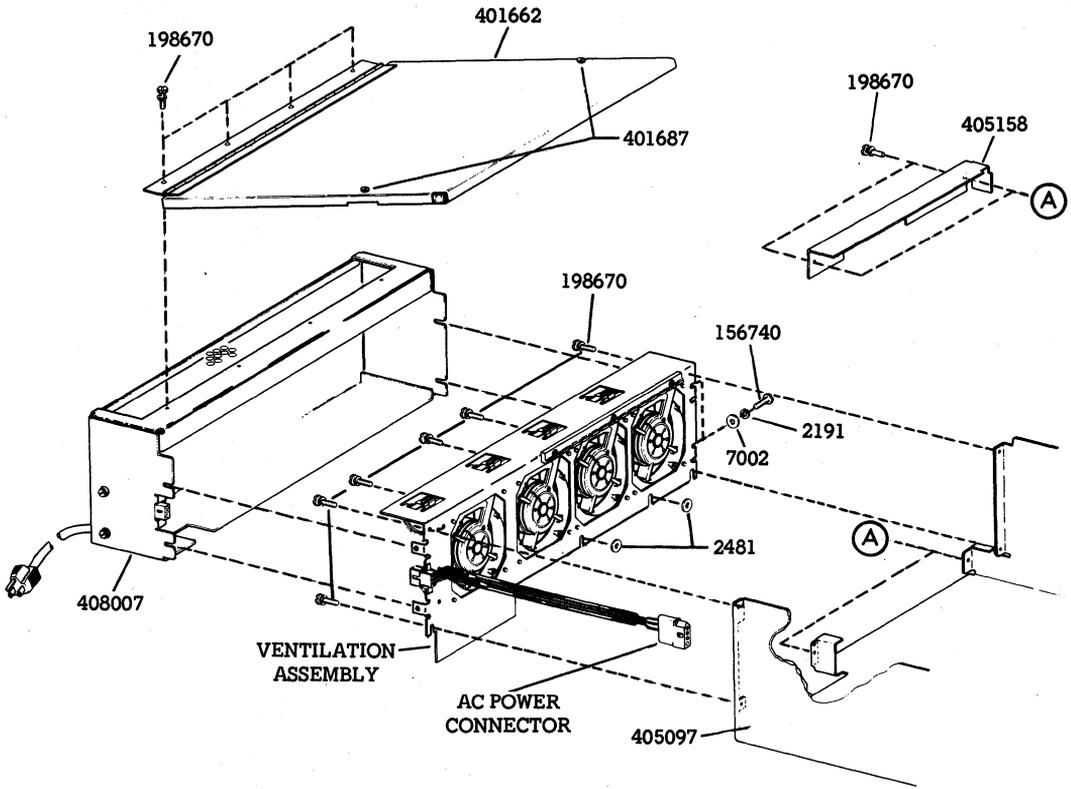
Mounting Hardware for Fan Guard, Ventilation Assembly, and Cover
